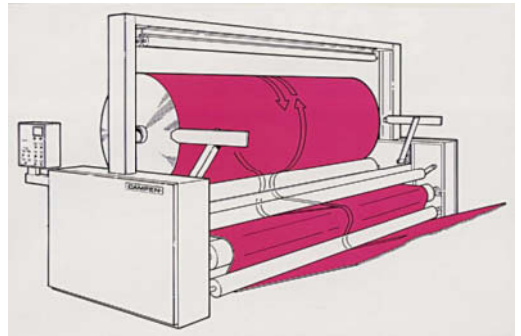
Carpet rolling machine SCW 5000 (Campen).
